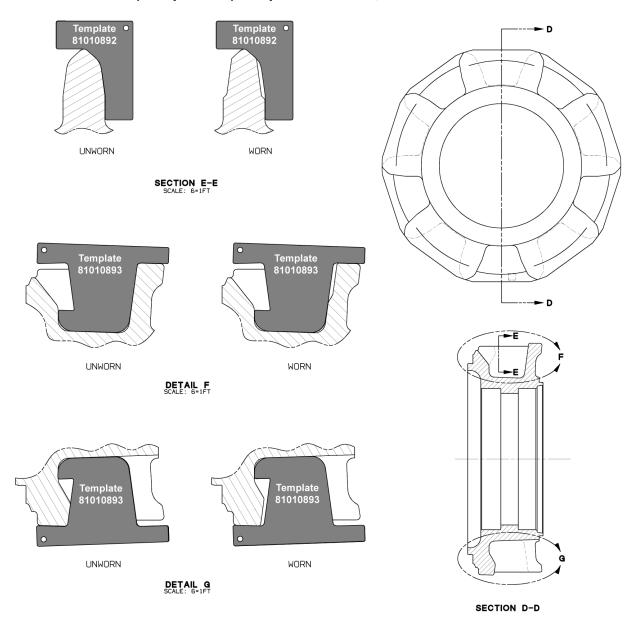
Drive tumbler (no sprocket) templates — 2250, 21000
